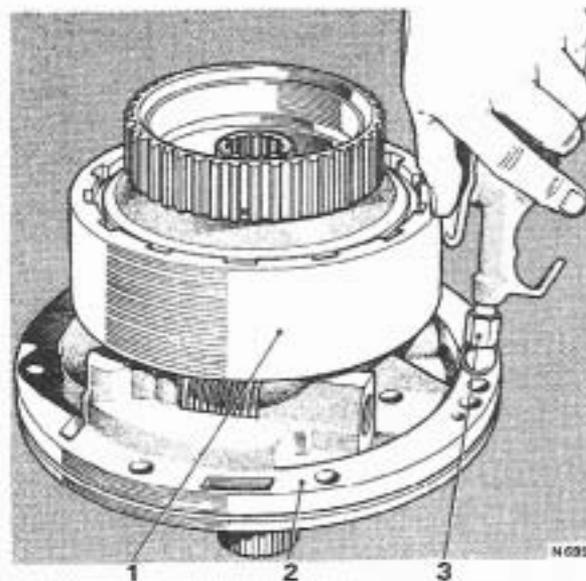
AIR TESTING THE FORWARD CLUTCH
